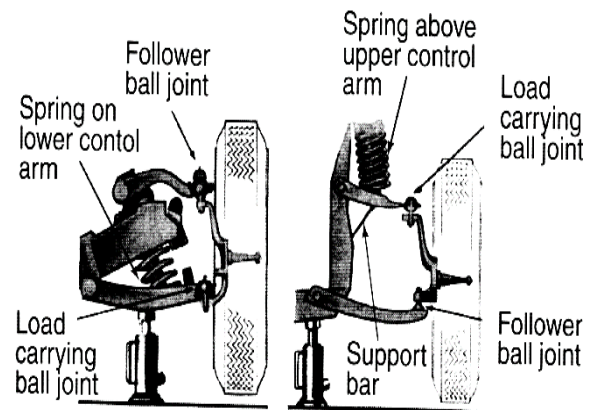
6 when checking the clearance of a load carrying ball joint, the load of the vehicle must be removed from the ball joint using a jack placed in the correct location depending on whether the load-carrying joint is the lower or upper one.
